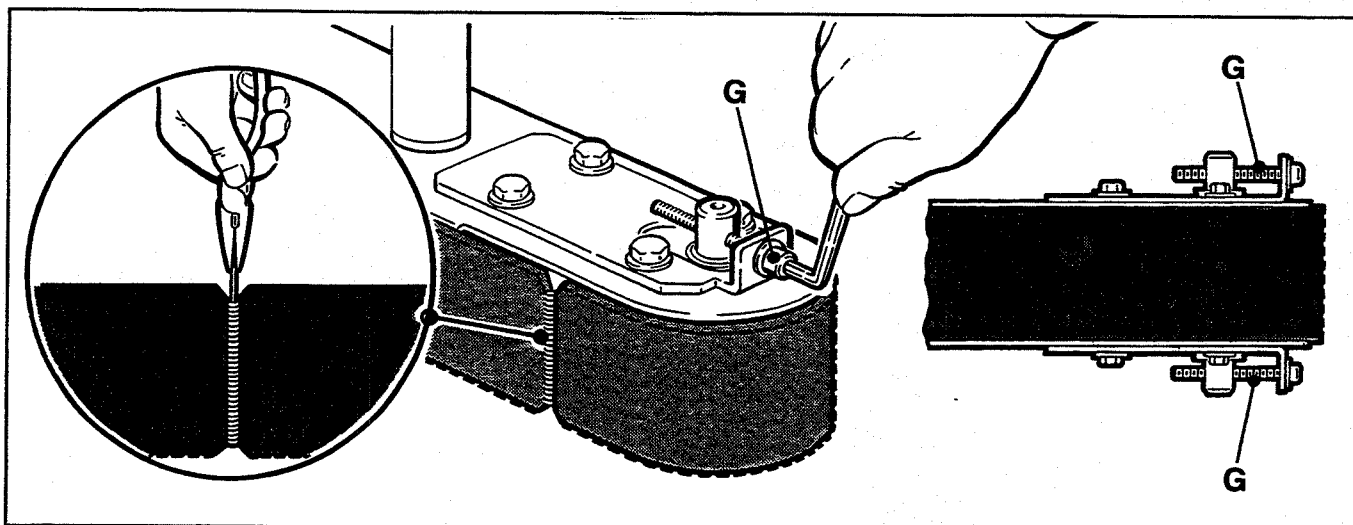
Box Drive Belt (Left Side View – Infeed End)
